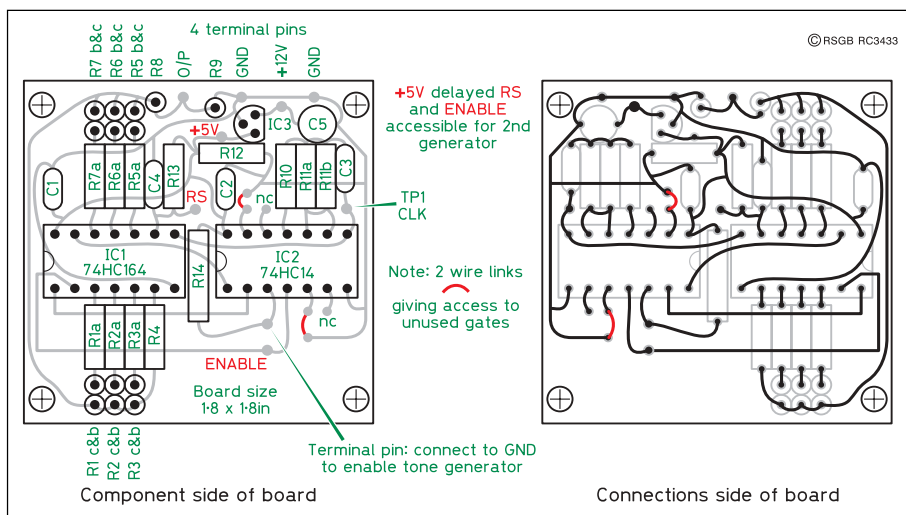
Layout for the basic generator. To save board space, two of the possible three resistors in a weight resistor string are installed vertically. Connections may be copper tracks on an etched single-sided PCB, or 'ugly' wiring on perforated board. On a PCB, drill all holes 0.7 or 0.8mm initially, then enlarge the terminal pin holes to 1mm and the mounting holes to 3.2mm.
